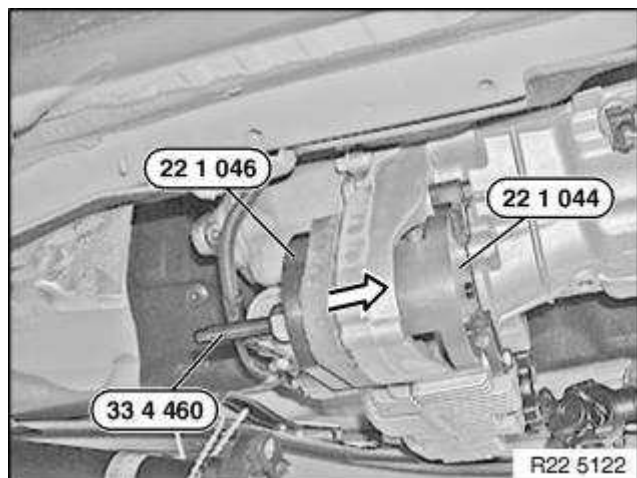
Bolt Special Tool 22 1 044 To Transfer Box
